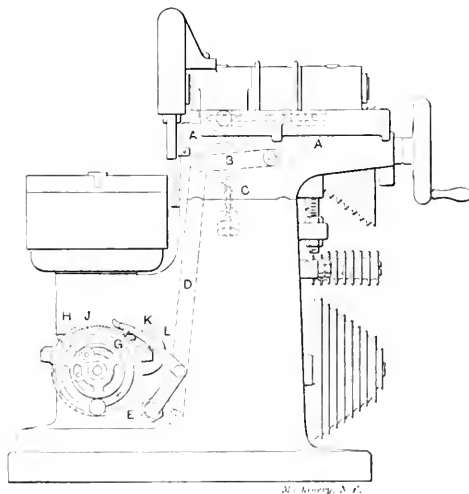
Automatic Feed Attachment on Heald Ring Grinder.
